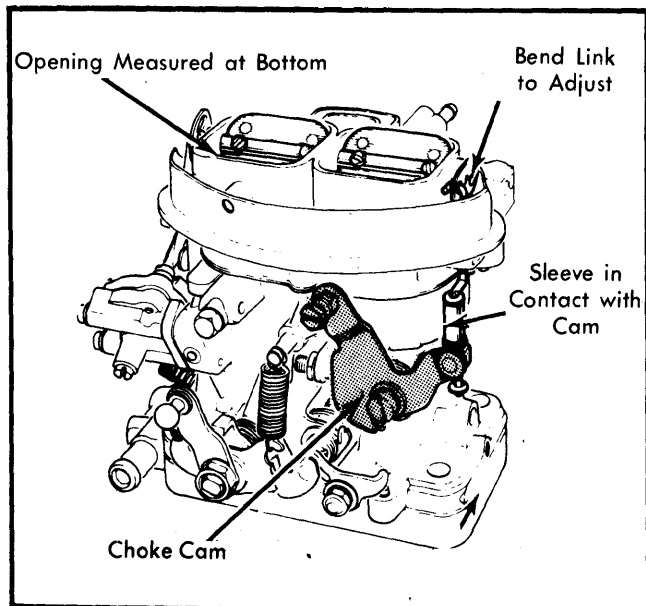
Initial Choke Valve Mechanical Adjustment (Federal Model Shown)
